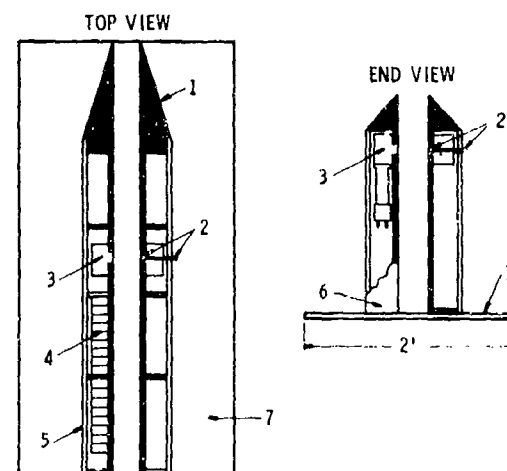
Assembly Drawing of BRL Biaxial Drag Gage⁸
